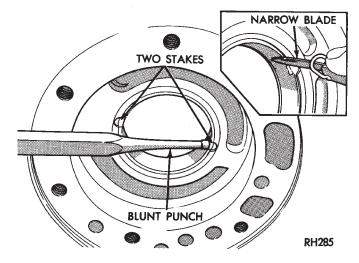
Staking-Deburring Oil Pump Bushing REPLACING REACTION SHAFT SUPPORT BUSHING (FIG. 59)
